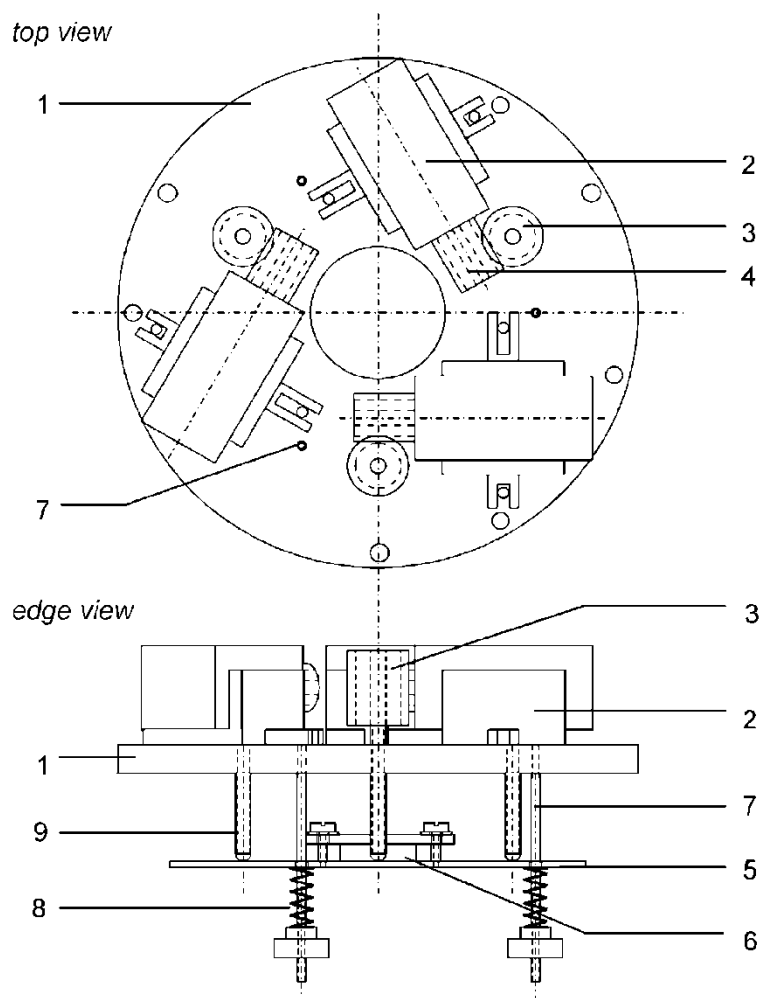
Drawing of the home-built STM head (not in scale): 1 - base plate, 2 - step motor, 3 - micrometer screw, 4 - worm gear, 5 - cell holder, 6 - electrochemical cell, 7 - guiding rod, 8 - spring, 9 - hemispherical head of the micrometer screw. Reproduced from ref. [1]
